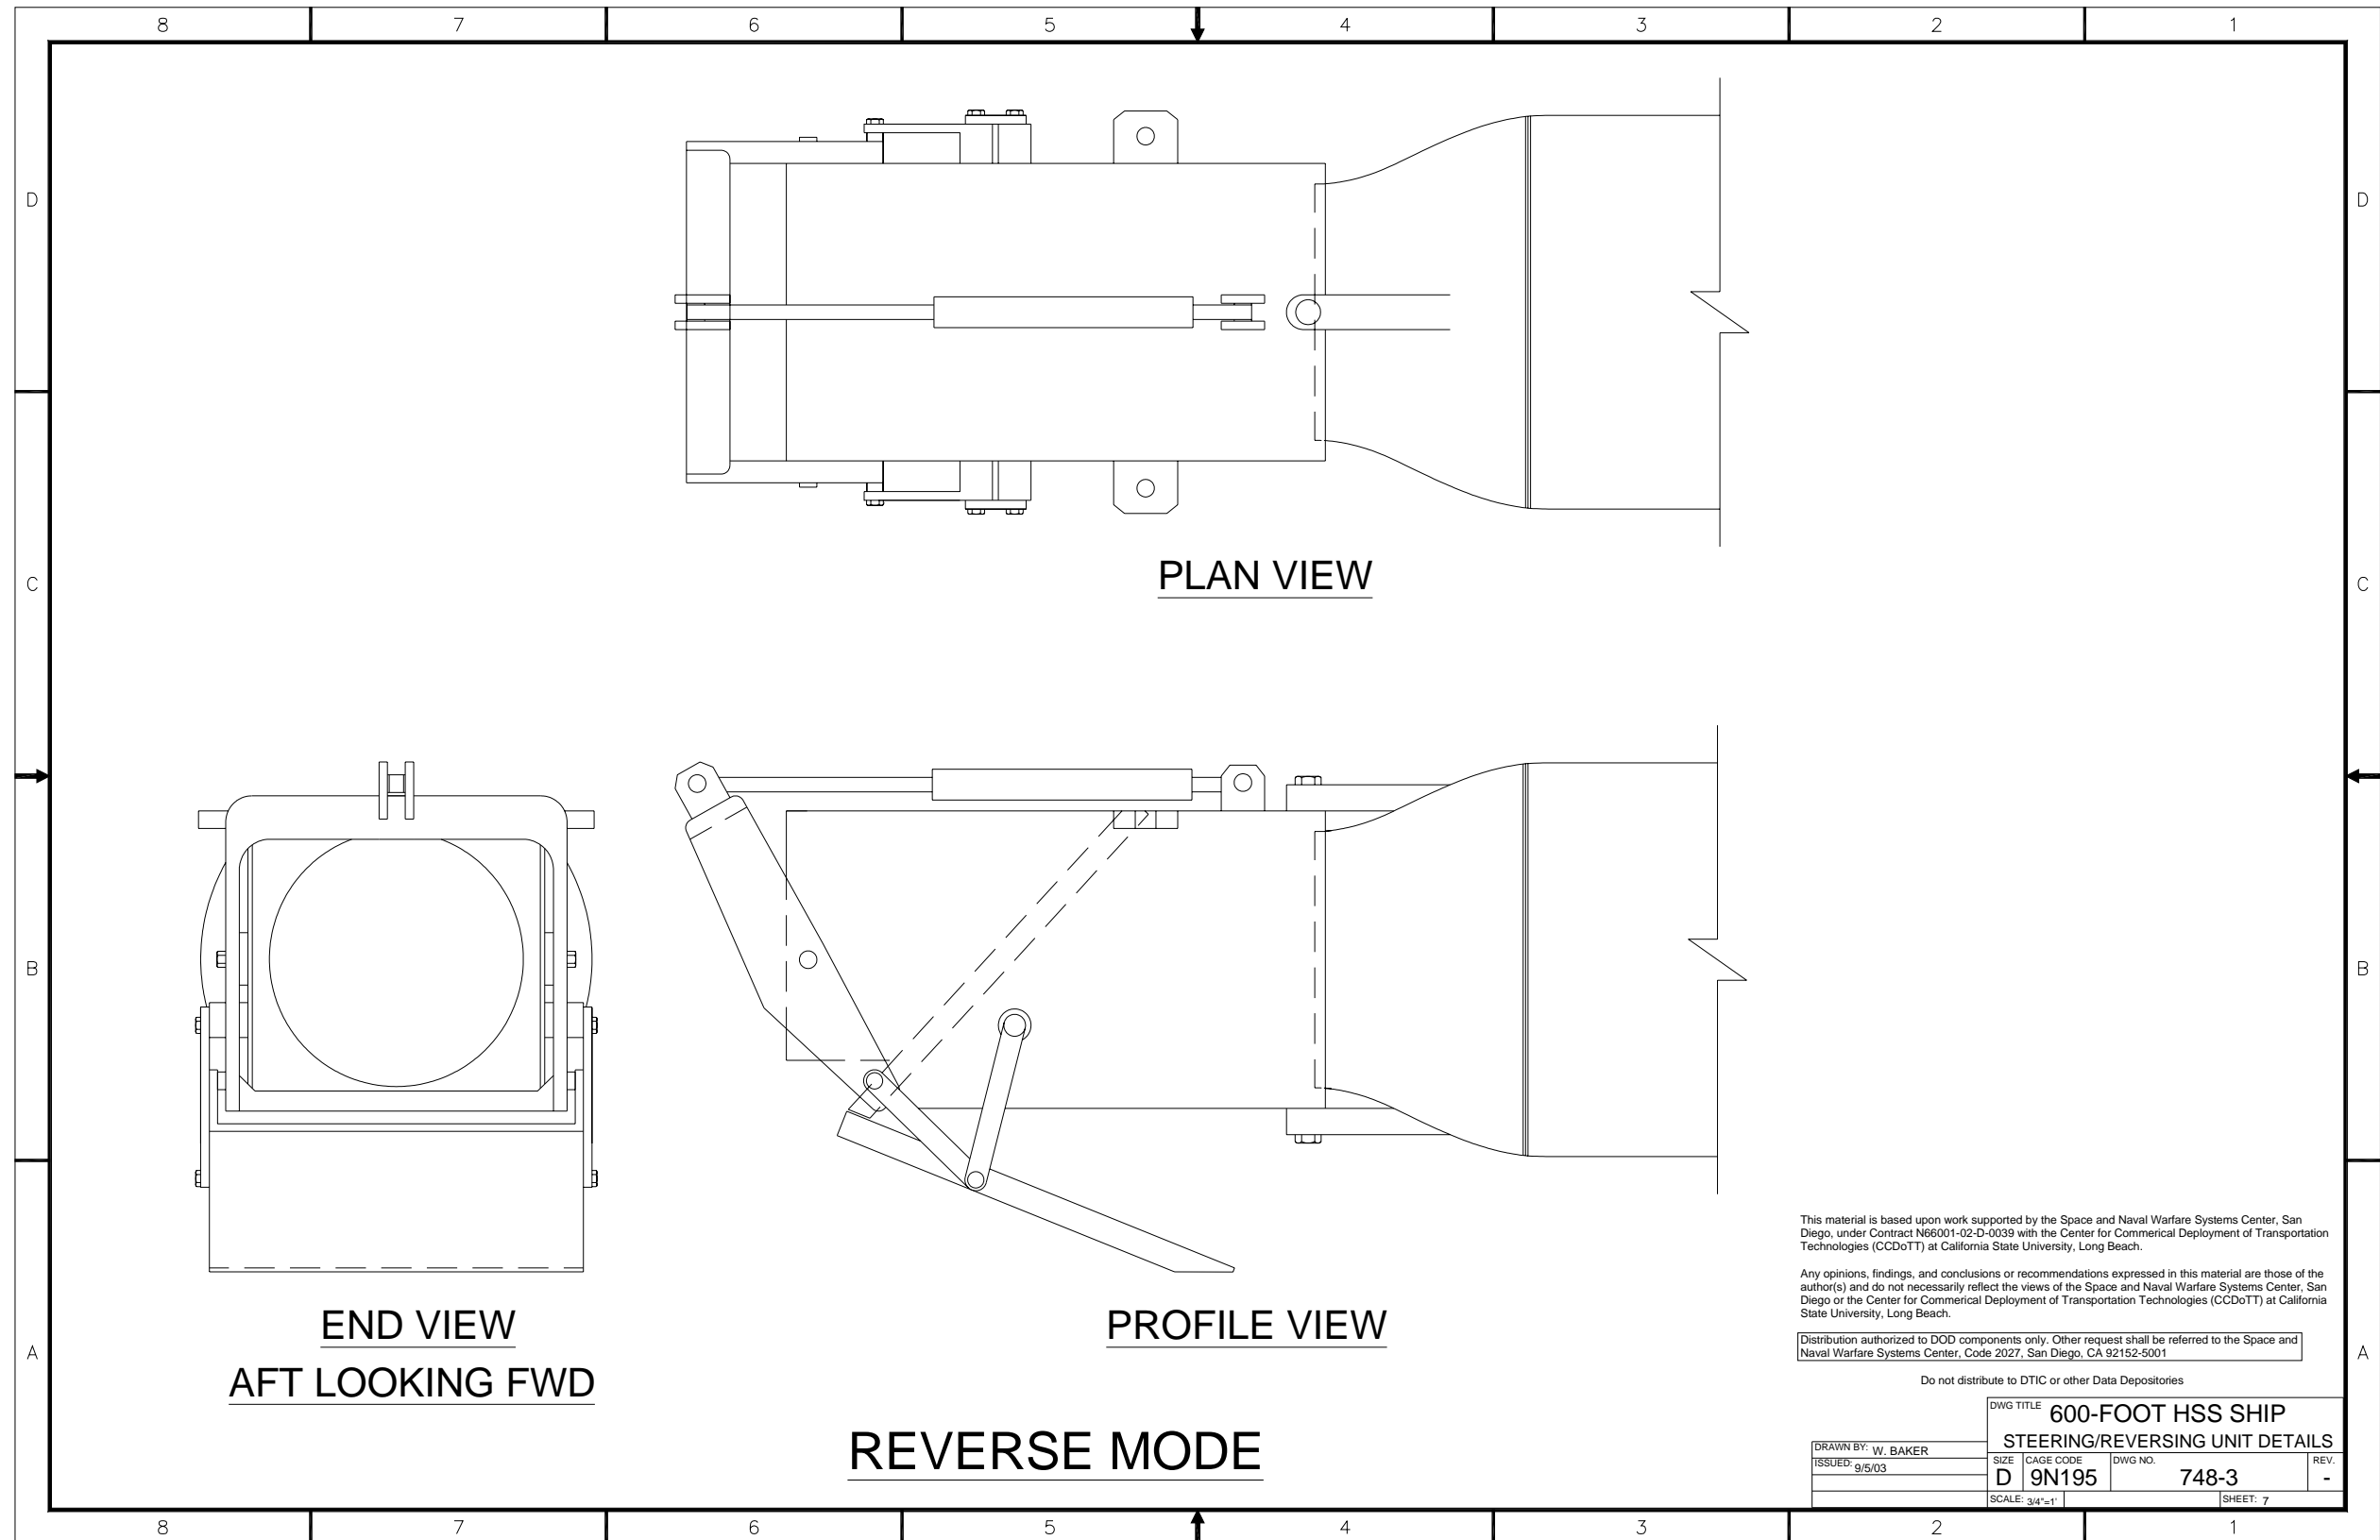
600-Foot High-Speed Sealift (HSS) Steering/Reversing Unit Details – Reverse Mode
